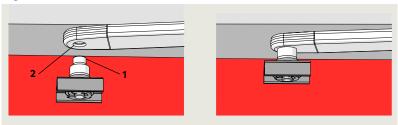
Track mounting holes in door, standard arm 1/2" pivot pin
